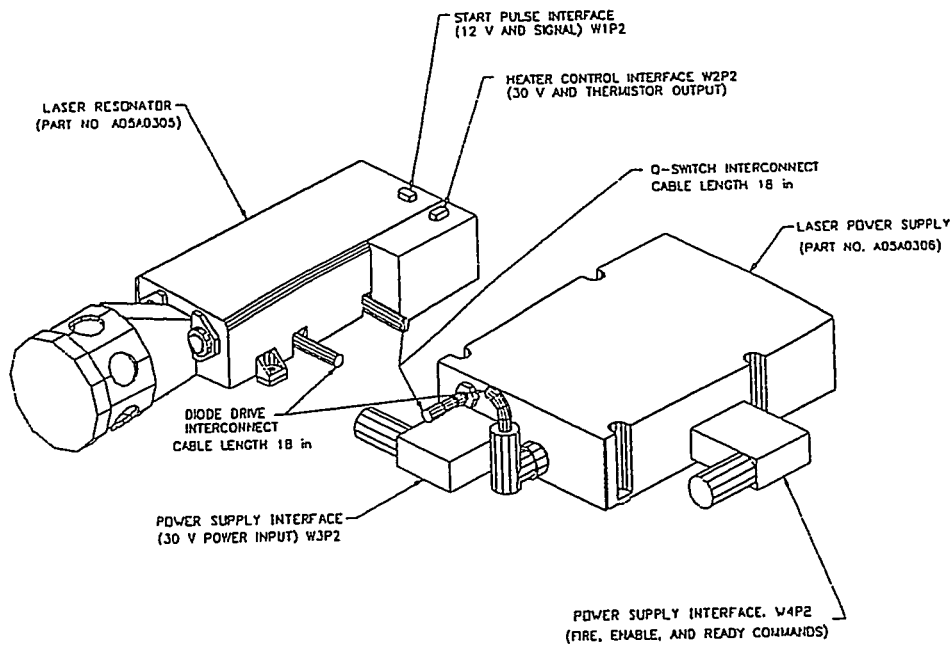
shows a schematic drawing of the Clementine laser transmitter assembly.
